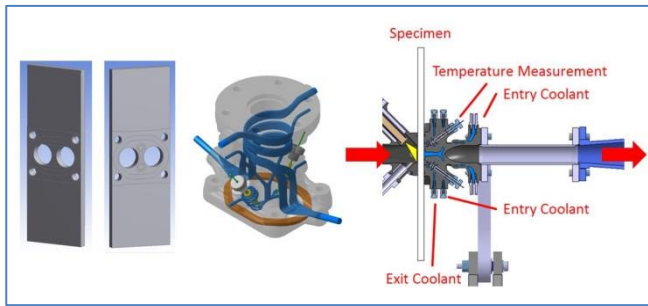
Adaption of specimen, design of cooling adapter Figure 6: Test rig
